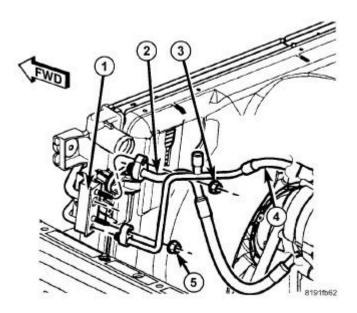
Refrigerator Lines To Condenser Courtesy of CHRYSLER LLC
